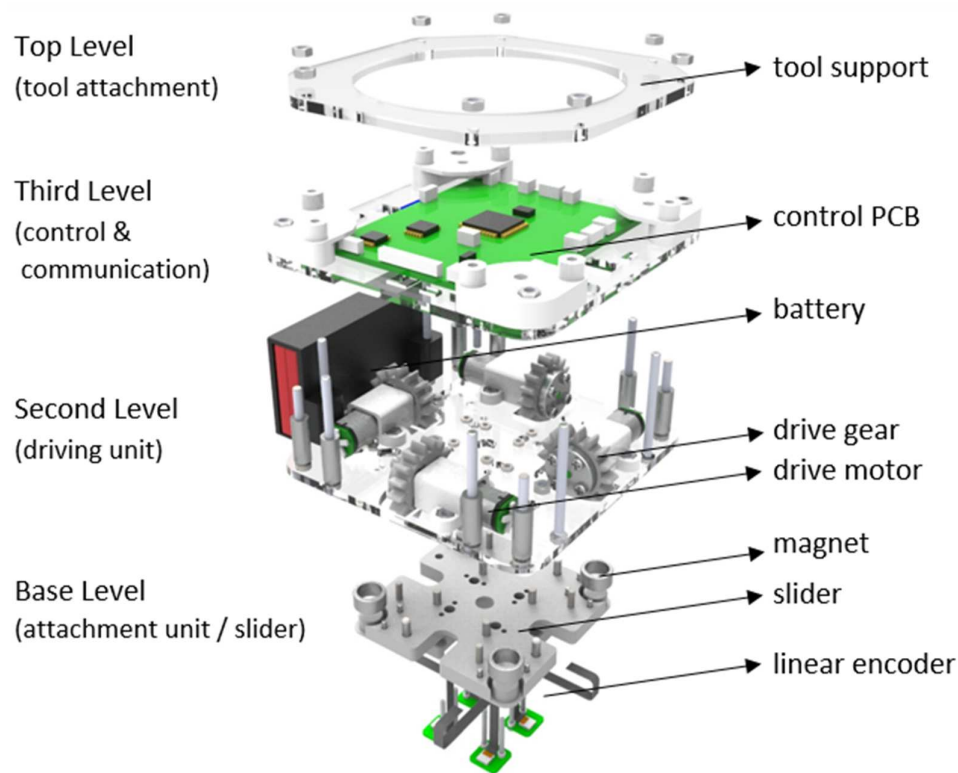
Exploded view of the second SCALA prototype agent, showing its components.
